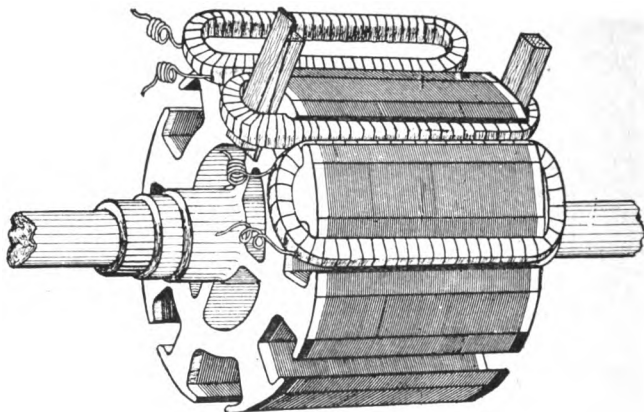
Coils Mounted on Rotor of Single-Phase Alternator
